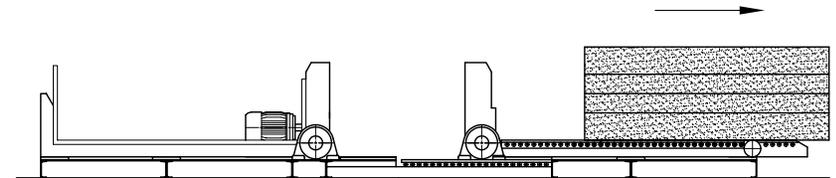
GENERAL ARRANGEMENT OF UFC JACKETING MACHINE
